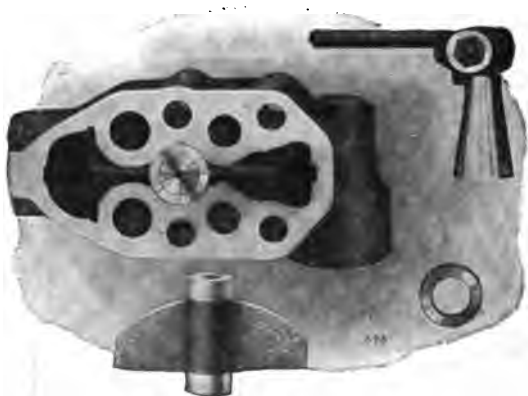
SEC. 10ee.—Butterfly valve and chest of Leyner-Ingersoll drill.
